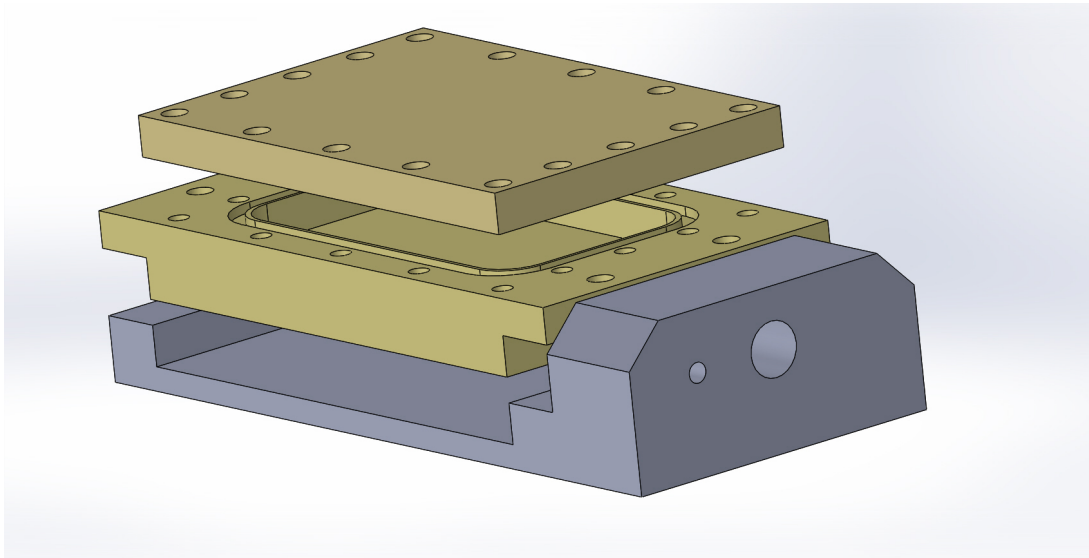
Explosion sketch of the constructed sample cell for the mercury measurement made out of Polytetrafluorethylene (Teflon) (brown). The mount (grey) is made out of Aluminum.
